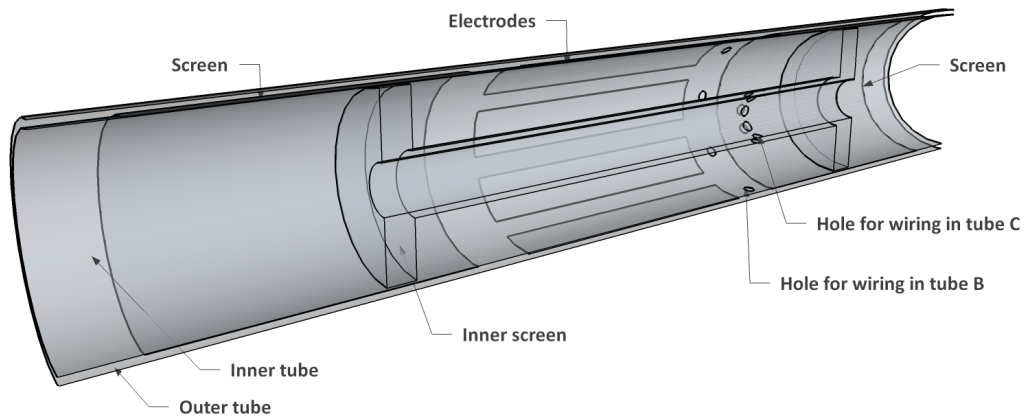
The image shows the inside of the sensor after it has been put together from the three parts shown in figure 6.5. The holes for the wiring are visible. After the BNC cables are drawn through the holes, they run inside the inner screen (tube C).
